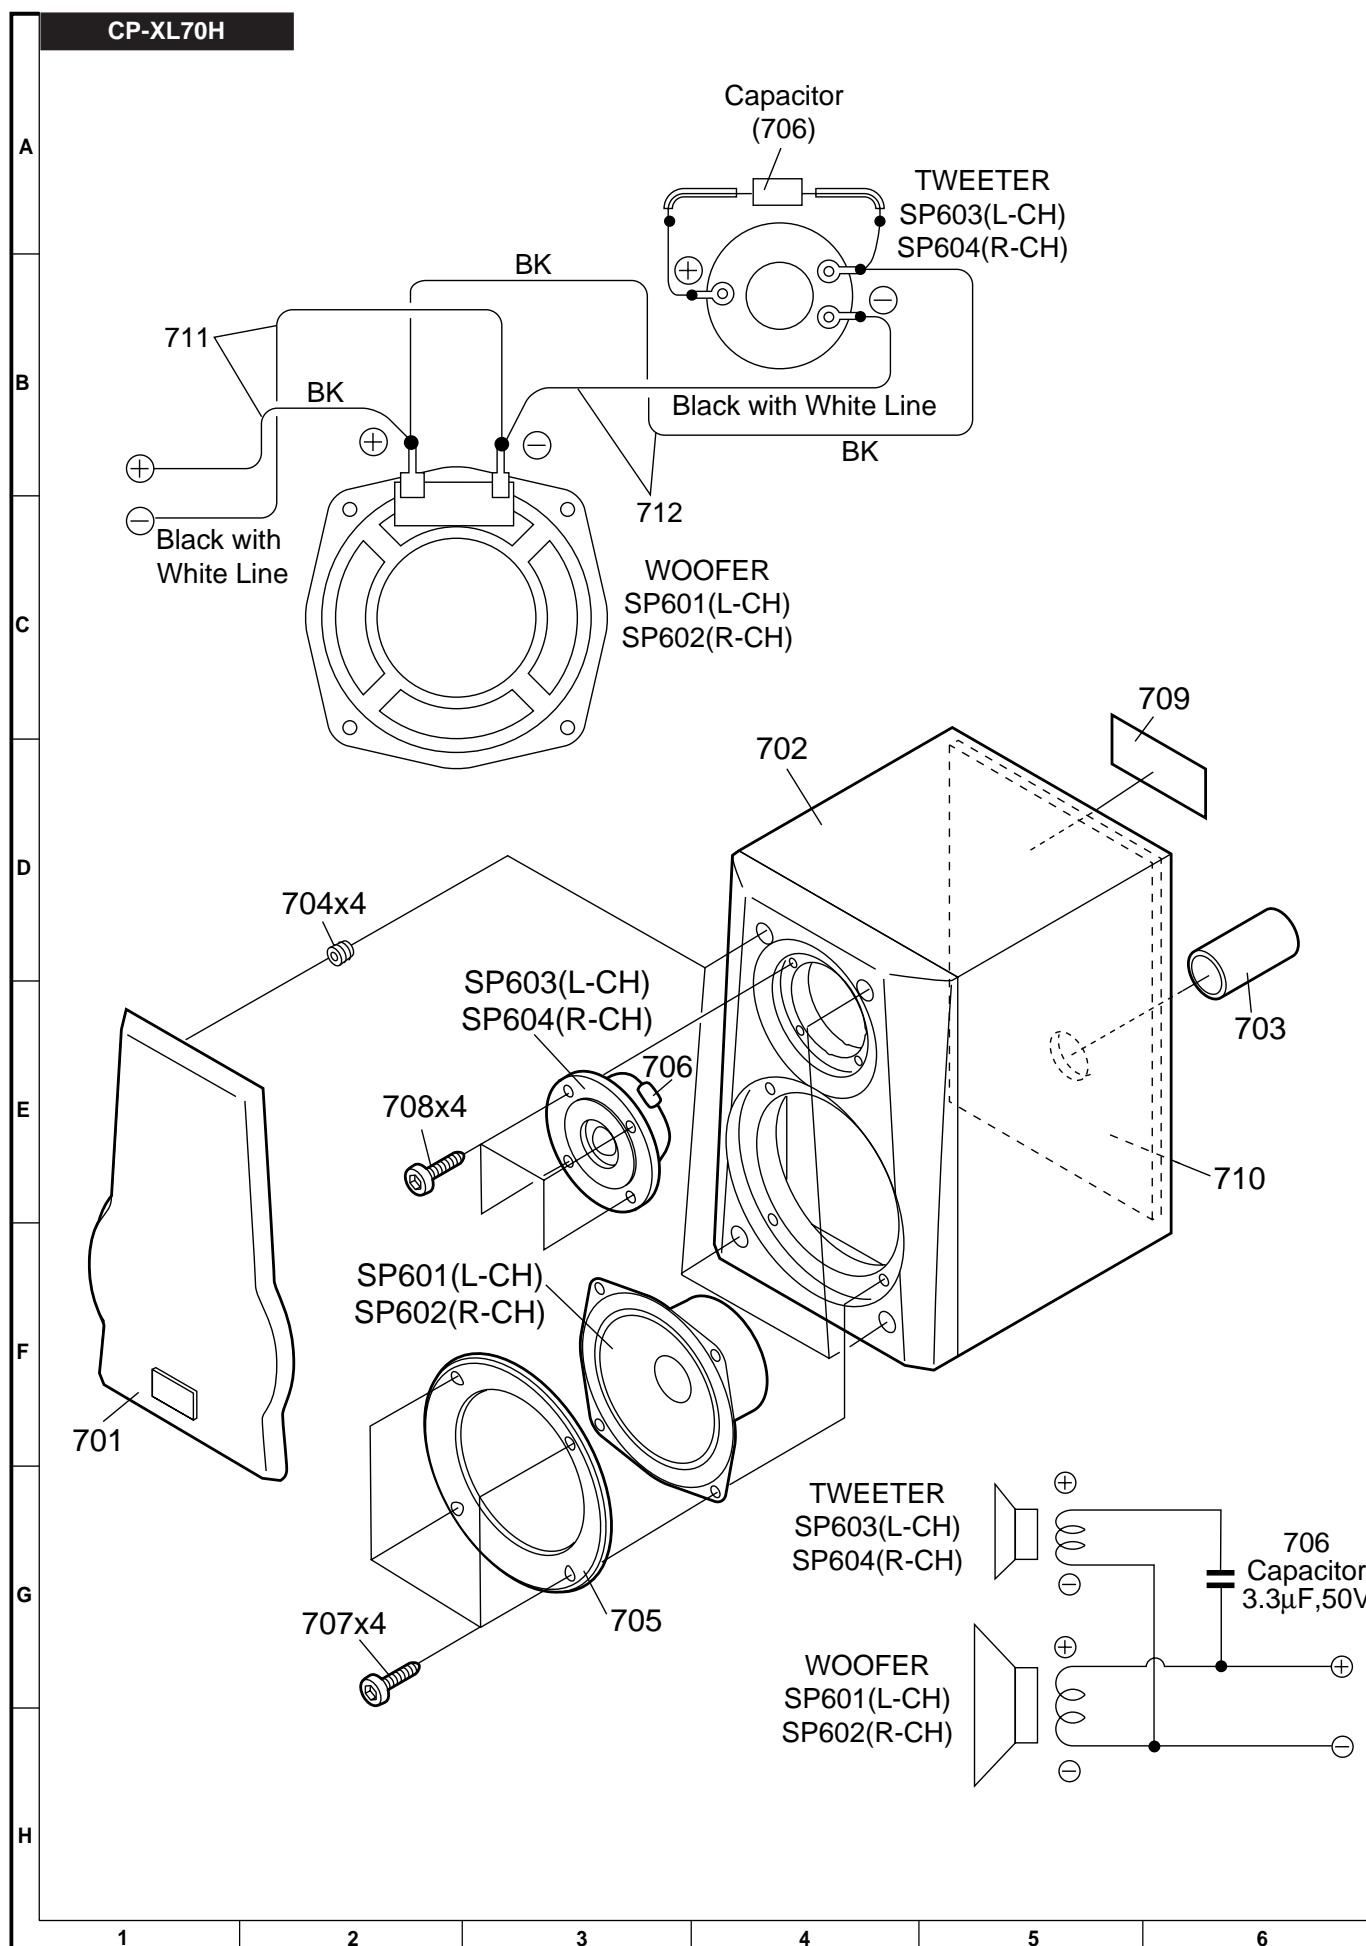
SPEAKER EXPLODED VIEW (2/2)
